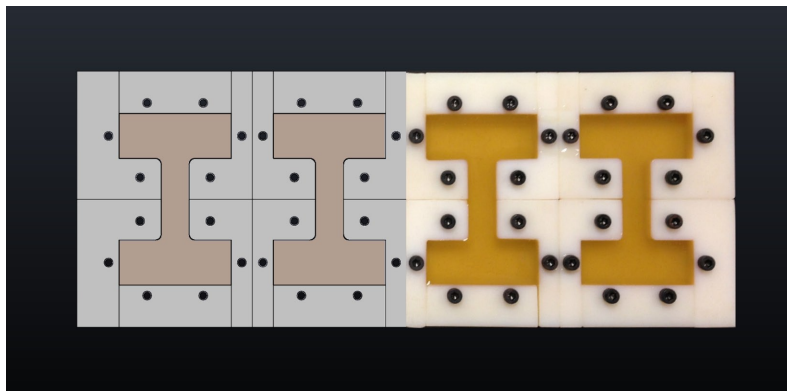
Puzzle mold. L: Concept R: Rapid prototyped mold with rubber.
